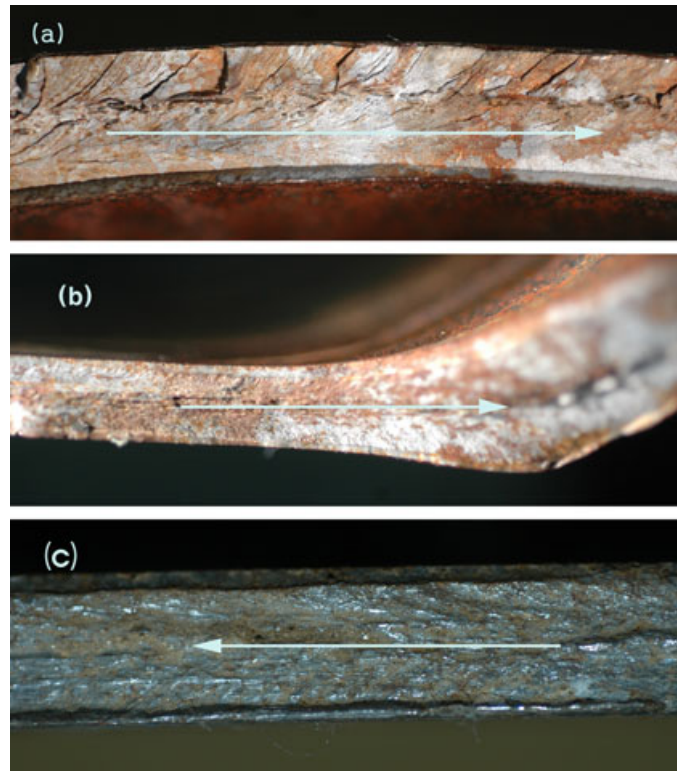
(a) The fractured surfaces of the lower dome (refer to point A in Fig. 3a). Chevron patterns are clearly visible. The arrow indicates the direction of crack propagation. (b) The fractured surfaces of the lower dome (refer to point B in Fig. 3a). Chevron patterns are clearly visible. The arrow indicates the direction of crack propagation. (c) The fractured surfaces of the cylindrical shell (refer to point C in Fig. 3c). Chevron patterns are clearly visible. The arrow indicates the direction of crack propagation.
